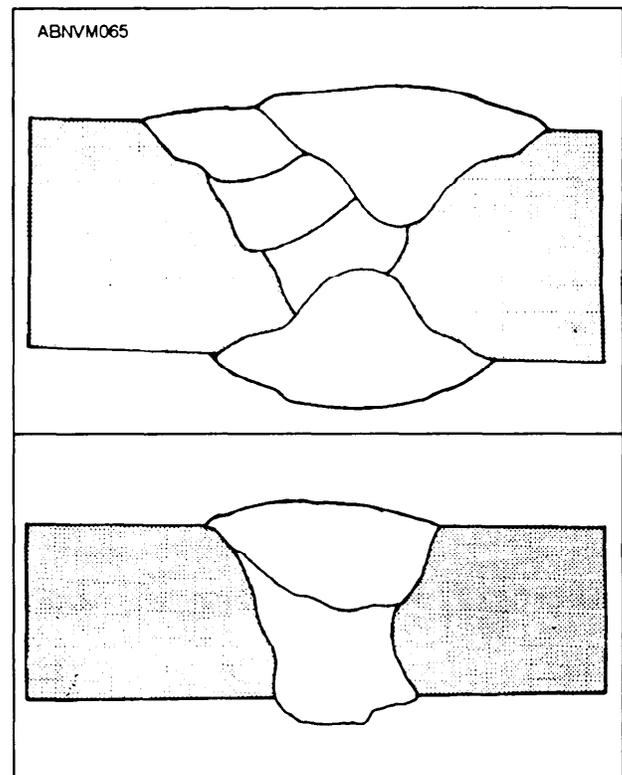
Cross section of good multipass GMA welds free from defects.
